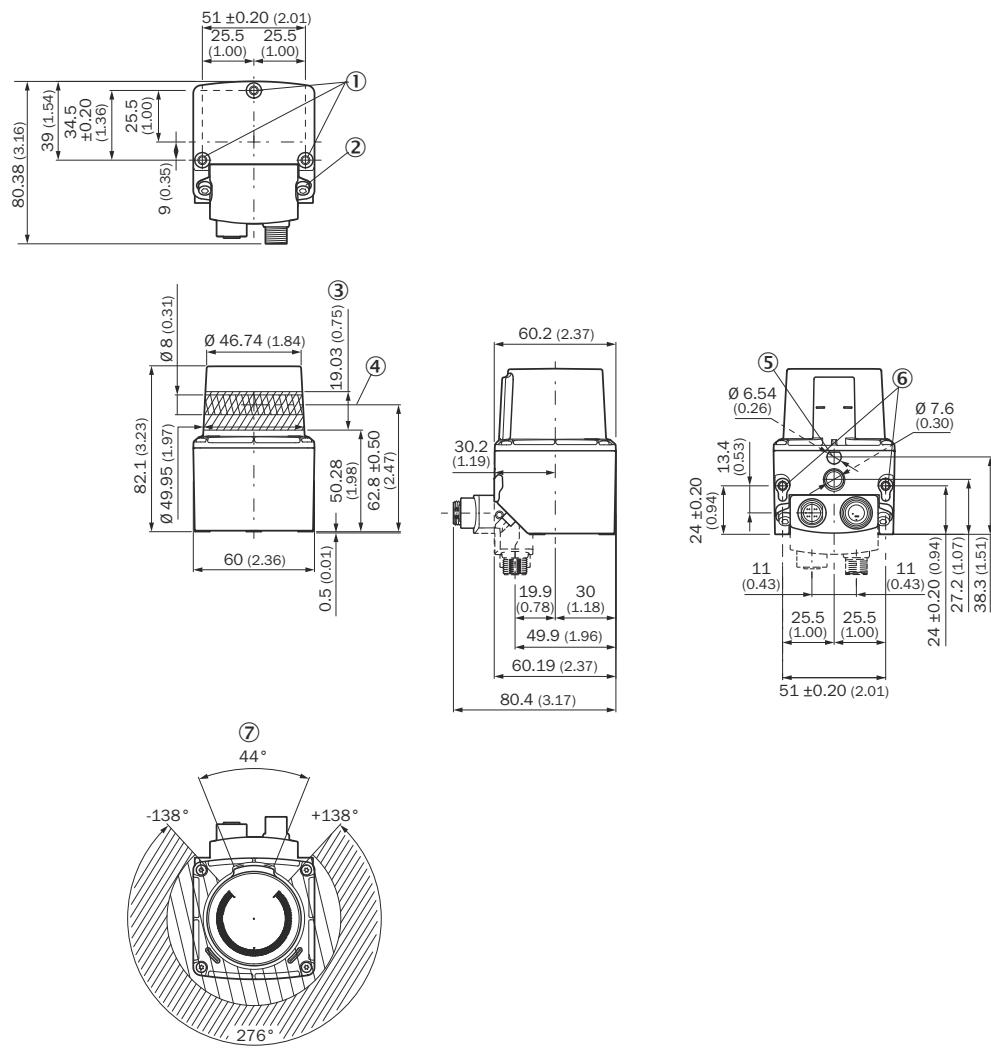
Dimensional drawing, unit of measurement: mm (inch), decimal separator: period
